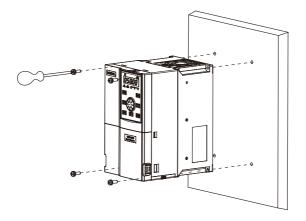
Backplate mounting of LS680T11GB to LS680T18GB and LS680-2T5.5GB to LS680-2T7.5G(B)
